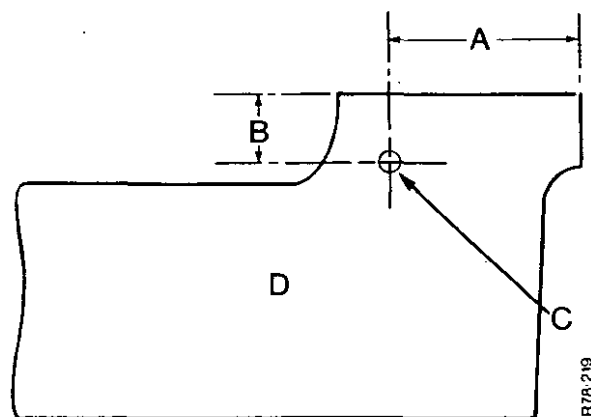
SIDE VIEW OF GEARBOX COVER
